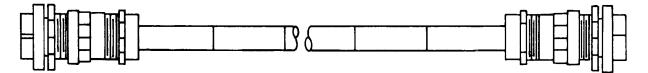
Cable Assembly CX-12022/U, drawing number SM-C-642209.
